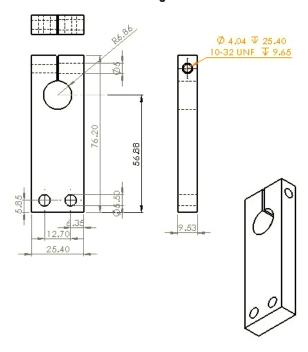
Dimensions for the mill headstock spindle locking bracket.
